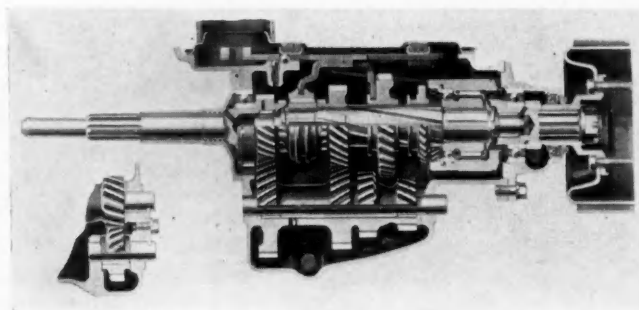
DODGE TRANSMISSION WITH SLIDING HELICAL GEAR ON A HELICAL SPLINE
